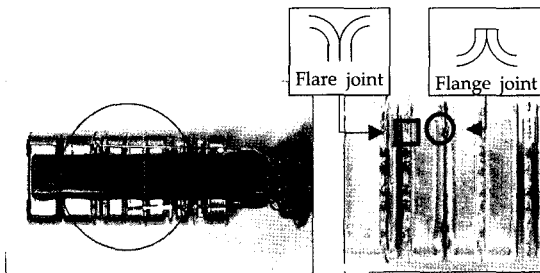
Laser spot welding points of electron gun in braun tube
